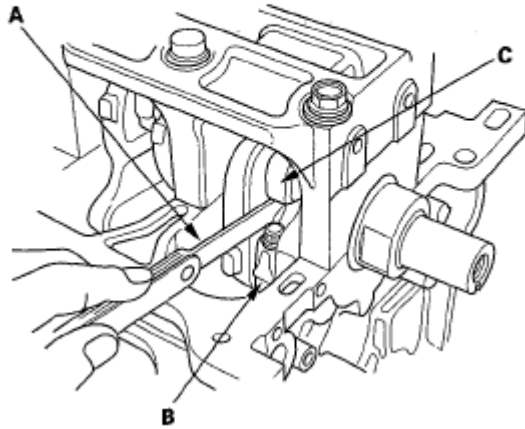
Measuring Connecting Rod End Play With Feeler Gauge Between Connecting Rod & Crankshaft
